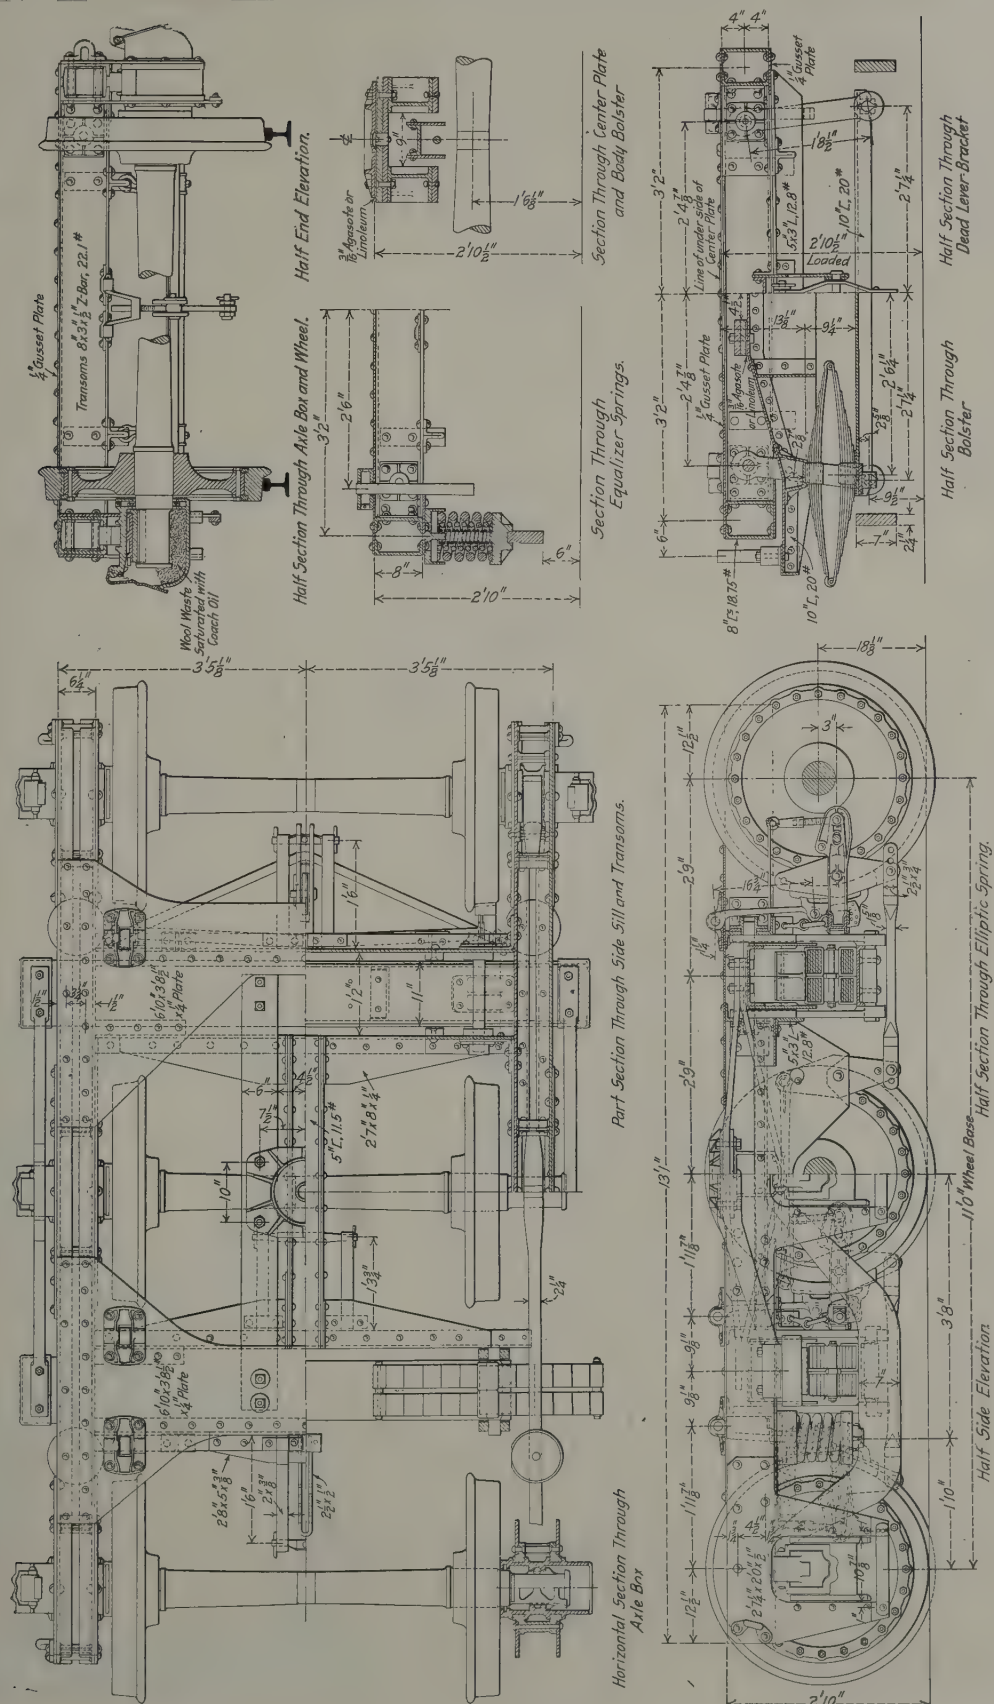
Six-Wheel Truck with Side Frame and Pedestals Forged in One Piece. The J. G. Brill Company.
